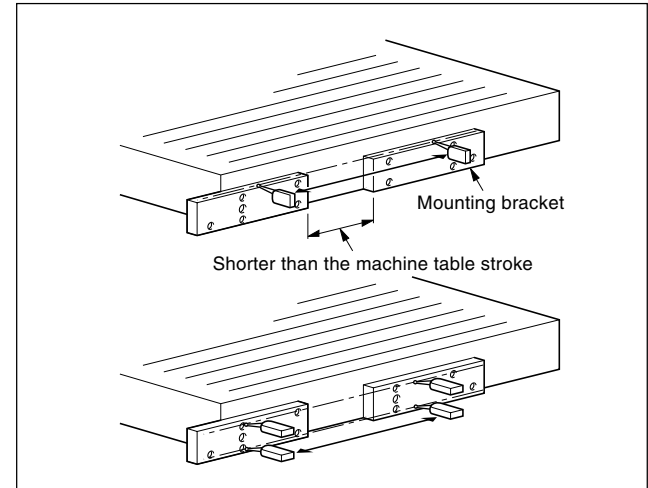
Length of mounting brackets and measurement of their parallelism
